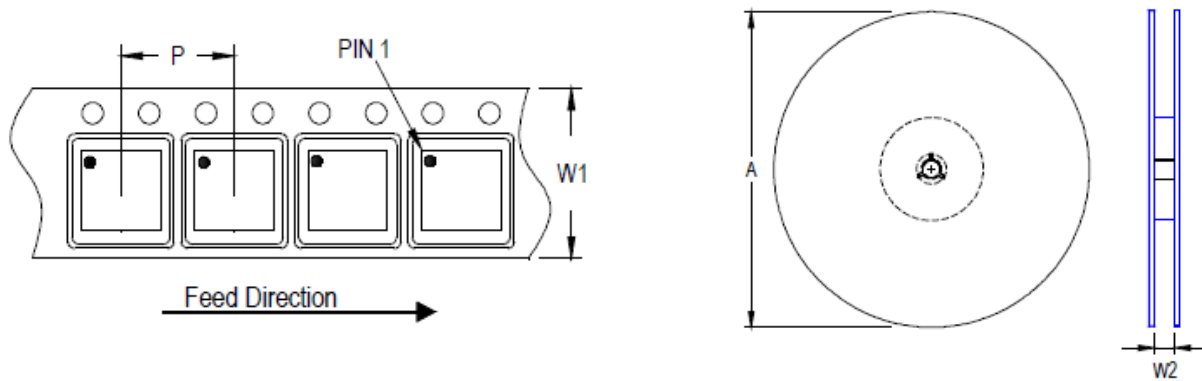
Tape Feed Direction and Reel Dimension Drawing
